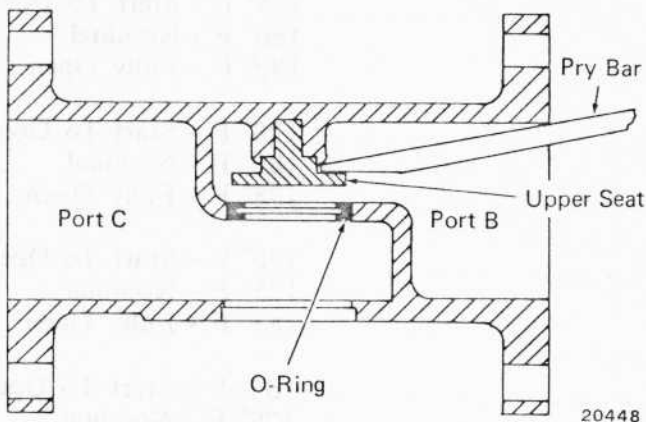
Upper Valve Seat Removal With Pry Bar
